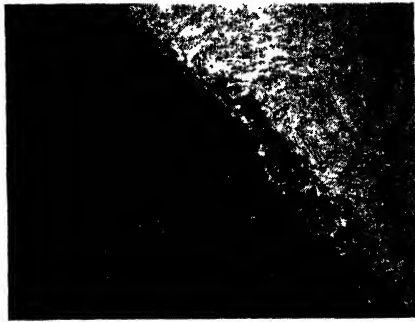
Bronze weld in cast iron. $\times 100$
